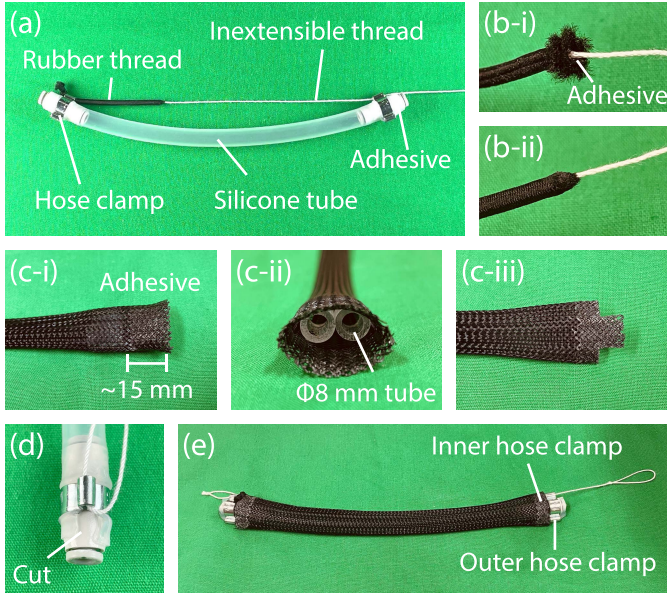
Fabrication of stretchable muscle. (a) Internal structure assembly. (b) Connection between rubber thread and inextensible thread. (c) Sleeve preparation. (d) Cutting of silicone tube. (e) Sleeve installation.
